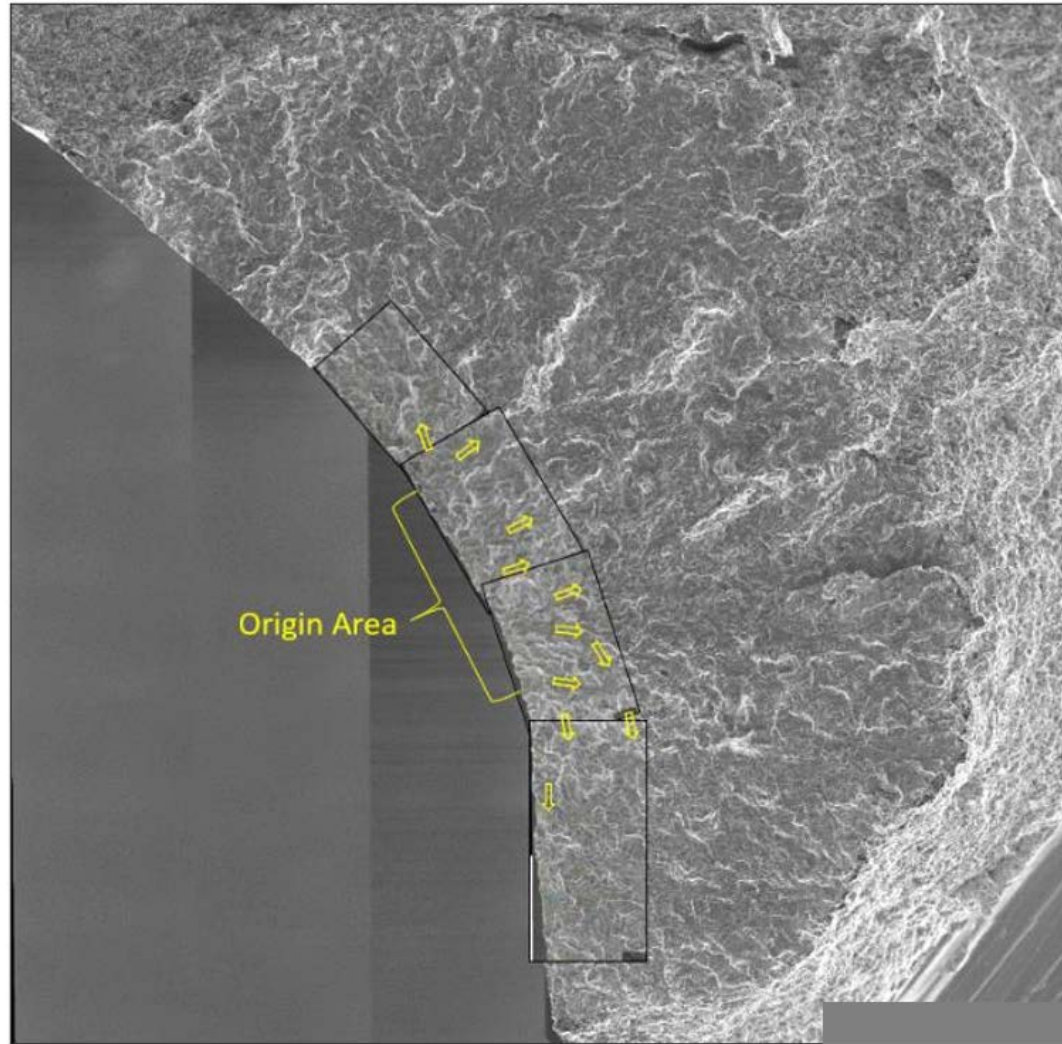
The outboard secondary crack origin area was located at the radius runout to the rib, consistent with the flowpath fracture surface and other secondary cracks. Some of the crack surface was smeared, likely due to damage during the event.
